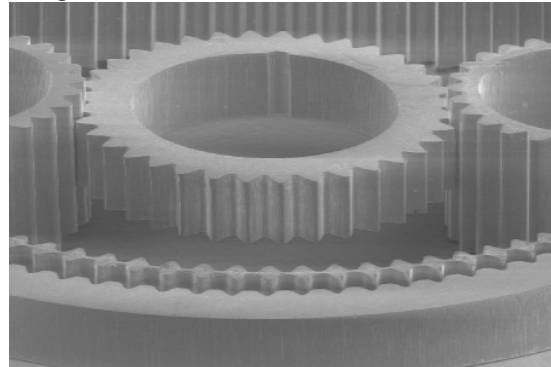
Close up view of a metal sun gear assembled with planetary gears. The central bore in the sun gear enables mounting of a hollow shaft.
